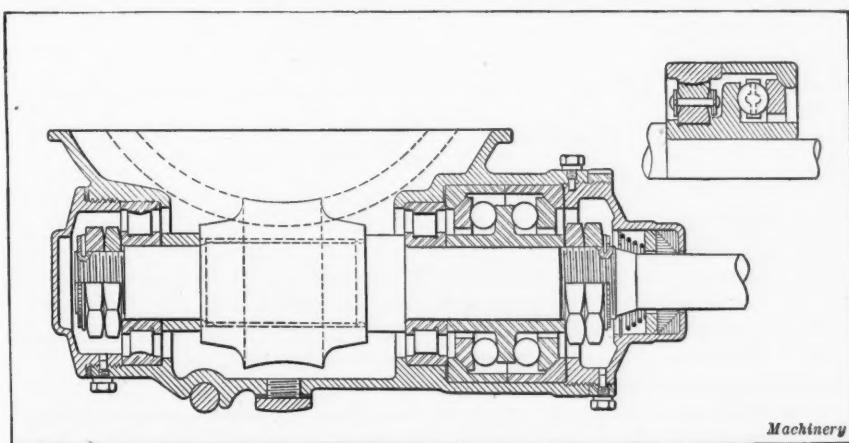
Application of Radial Roller Bearings and Ball Thrust Bearings on Worm-shaft
